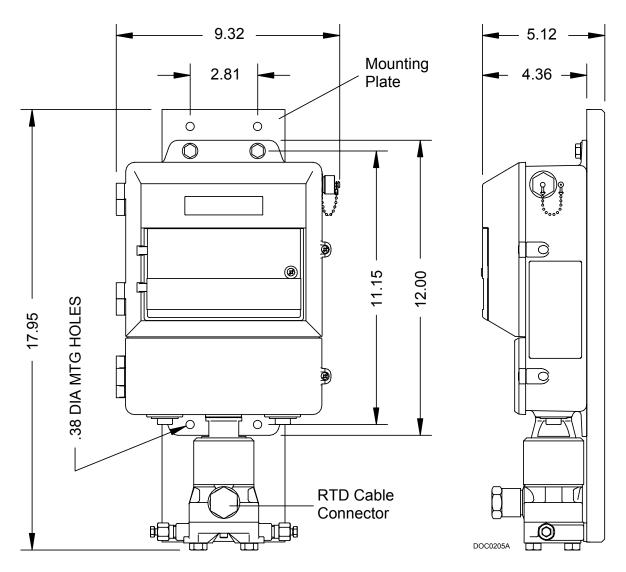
FloBoss 407 and Integral MVS Outline and Mounting Dimensions
